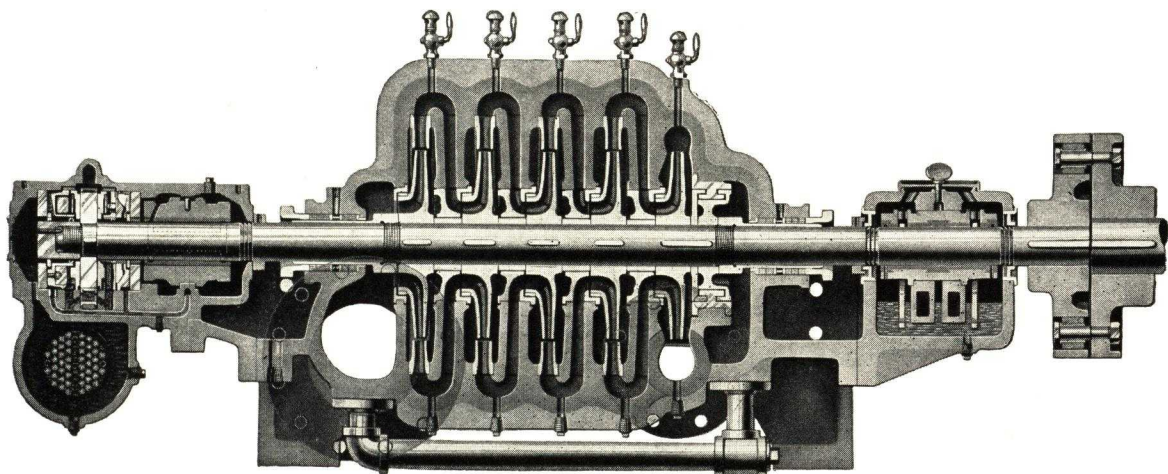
Sectional View of a Warren 4-Inch, 5-Stage Boiler Feed Pump
